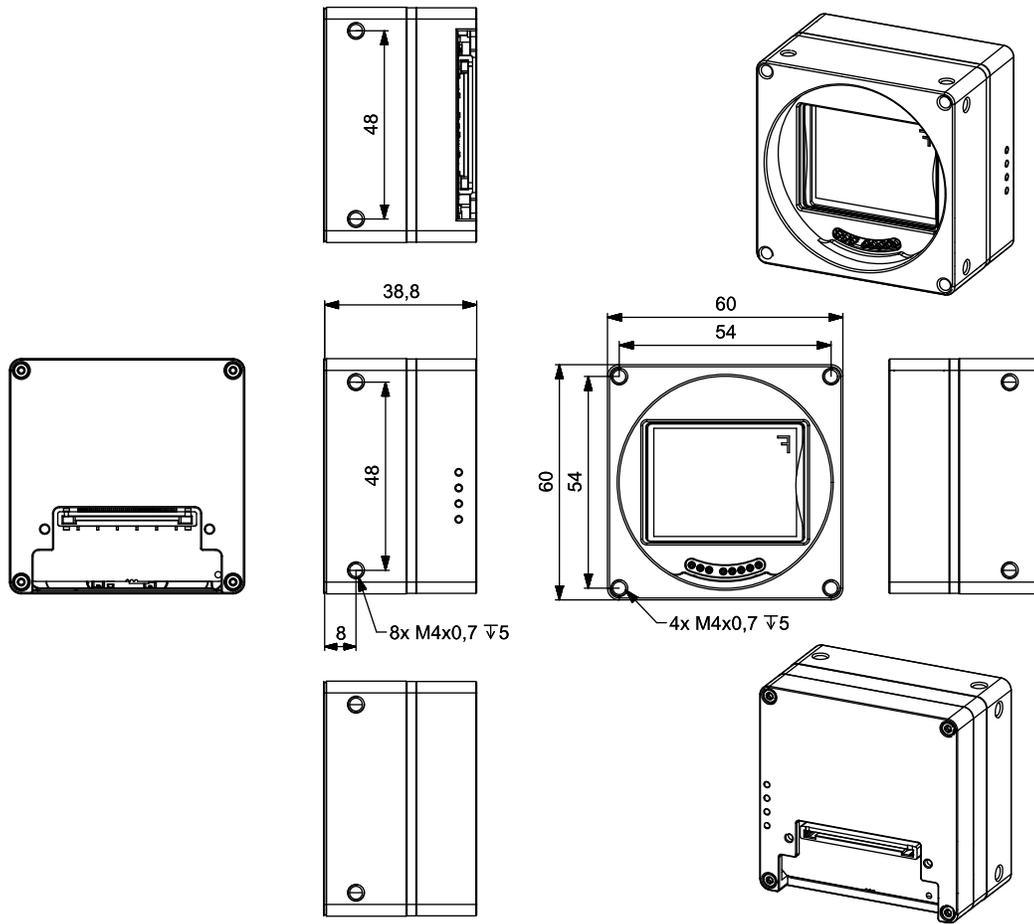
Dimensional drawing of MX500xG-CM-X4G2-FV
